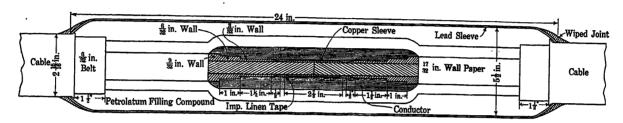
Construction and Dimensions of Impregnated-Paper Step Joint Three-conductor 300,000 cir. mil., sector conductor 25,000-volt cable
